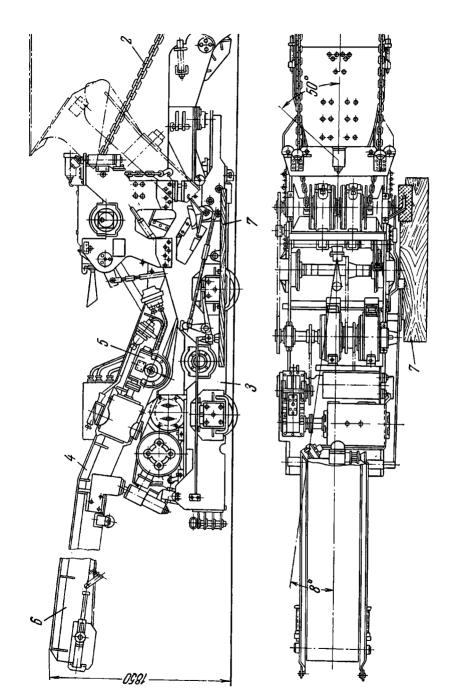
ППМ-5 (PPM-5) rock loading machine
